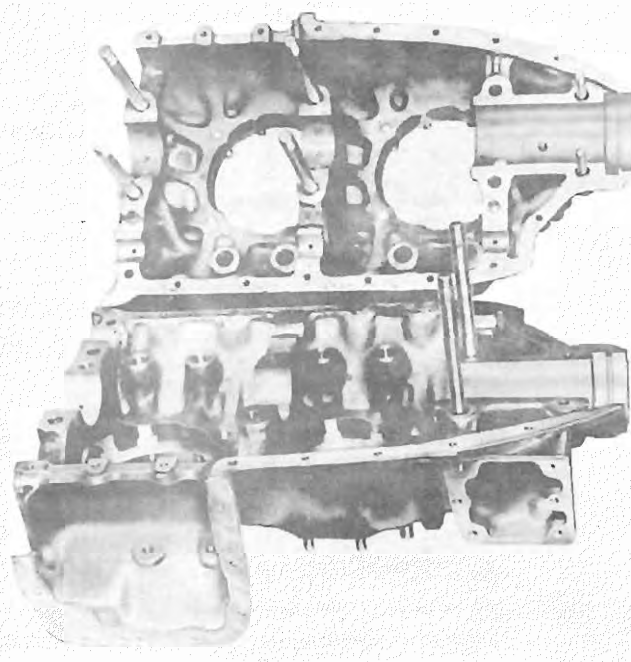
Right and Left Crankcase Halves Showing Through Bolts and Studs
